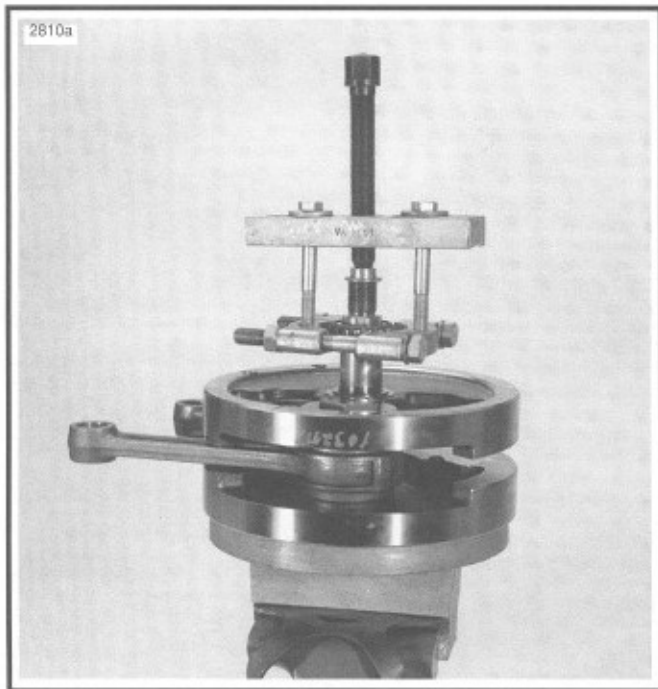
Removing Sprocket Shaft Roller Bearing
